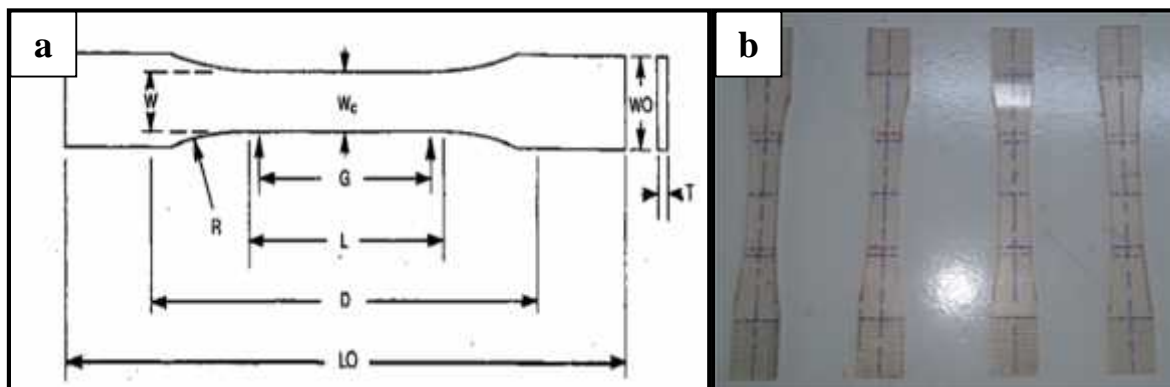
Tensile testing samples (a) as per ASTM standard (b) actual sample prepared for experimental work
